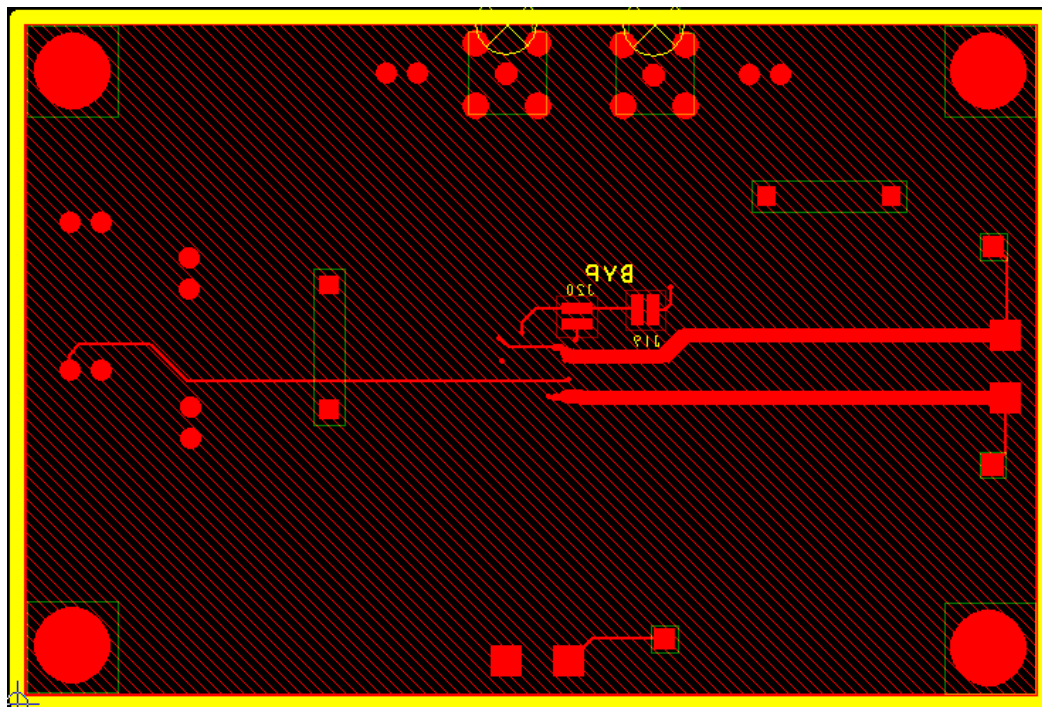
NCP2993FCT2GEVB Board Layout (Bottom View)
